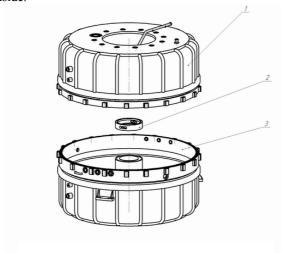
The cavity (isometry, disassembled view): 1–upper half-body; 2 – central ring; 3 – lower half-body
